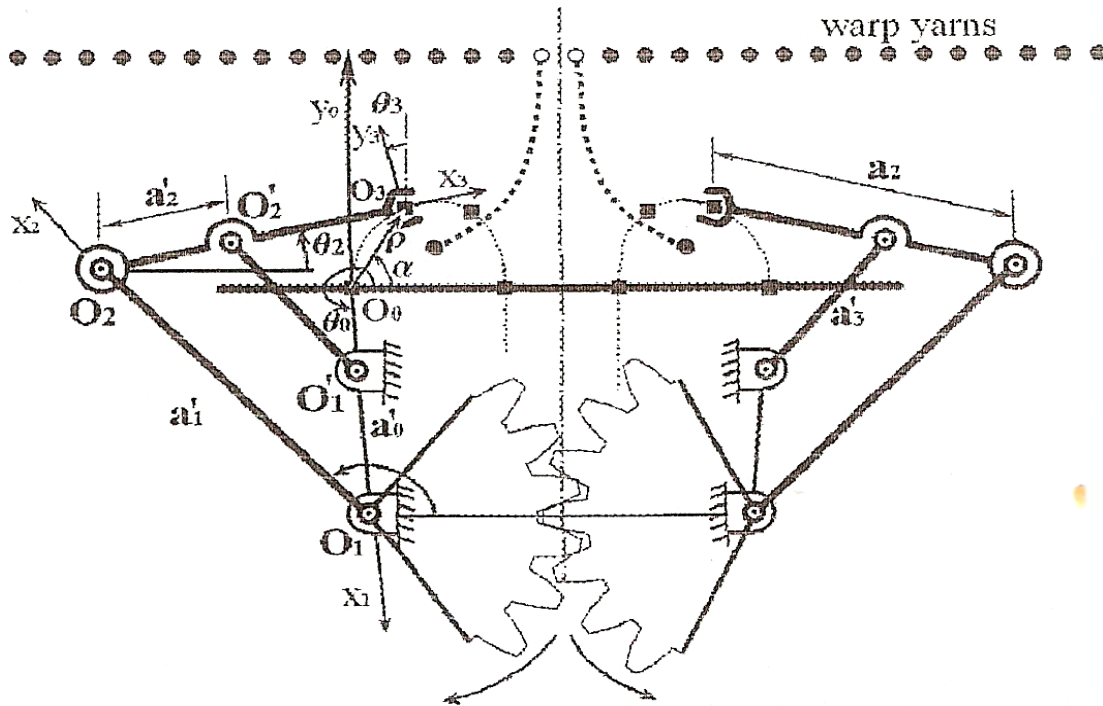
KNOTTING MECHANISMS WITH GEARS
